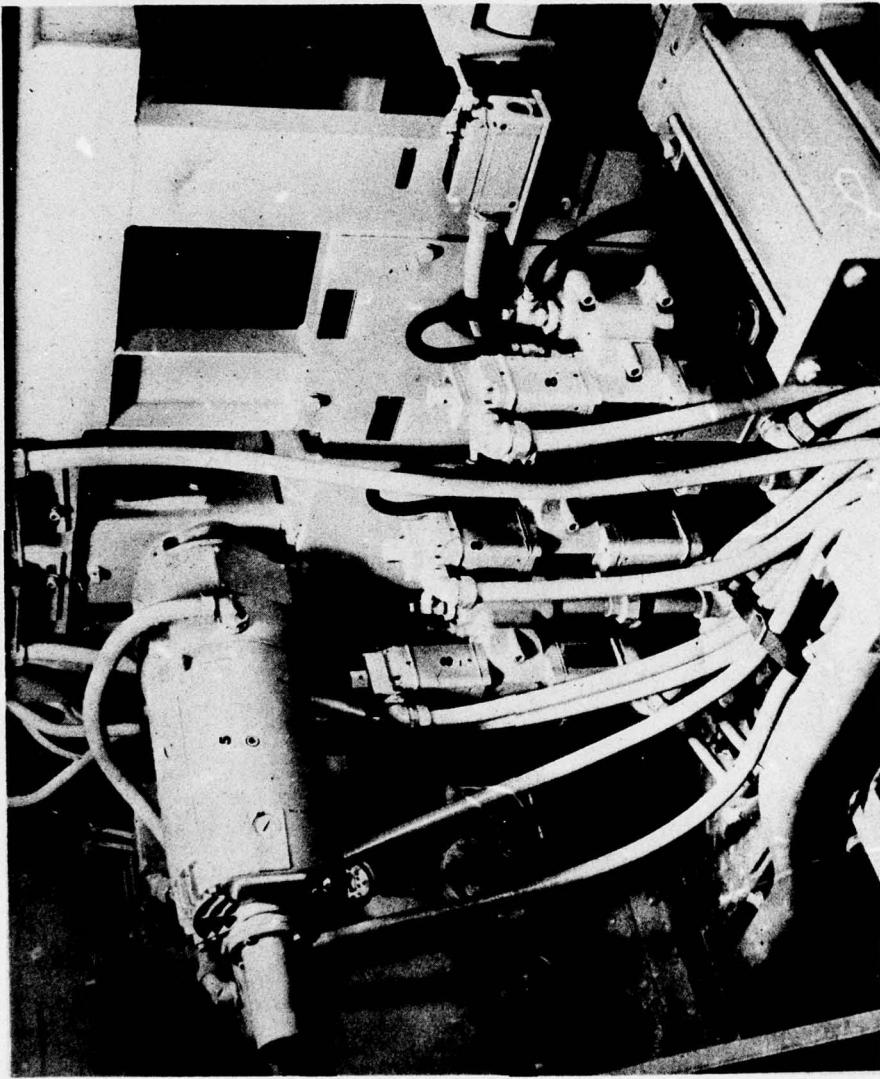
Rear View of PAHW Banding Machine Showing Projectile Drive Motor, Cams, Switches and Pneumatic Control Solenoids.
